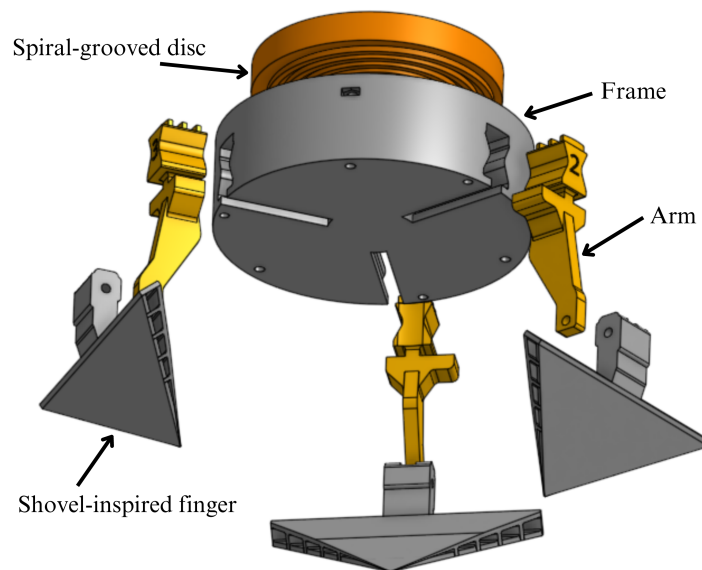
CAD design (exploded view) of spiral-driven mechanism for radial movement of fingers.
